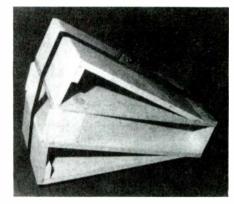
Attach the outer flare parts to the throat manifold assembly and use a strap clamp to hold them together while the glue sets.
